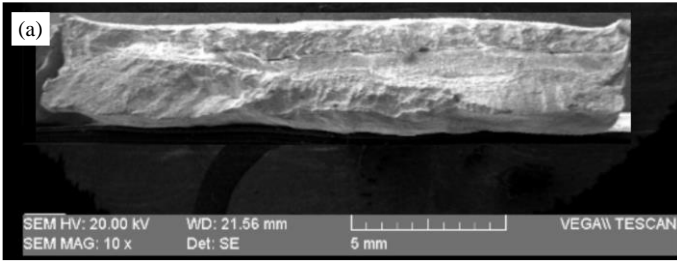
SEM images of the fracture surface of the weldment under tensile loading
